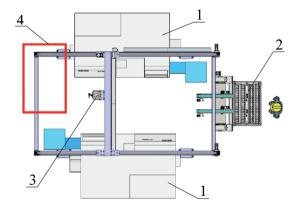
The structure of the technological setup: 1 – CNC lathe, 2 – blank storage, 3 – portal manipulator, 4 – location of the quality inspection module
